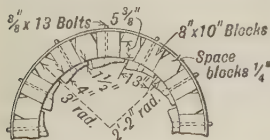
Method of reducing diameter of a cylinder mill (after Daman).
